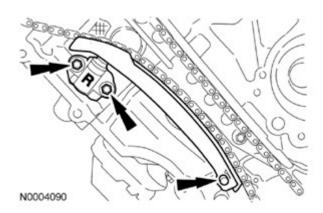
Locating RH Timing Chain Tensioner And Tensioner Arm Bolts Courtesy of FORD MOTOR CO.
